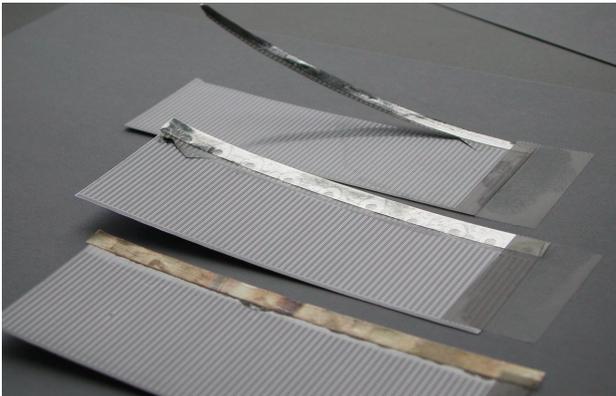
Stress on 80µm thin Ebara IBC cells interconnected to 70µm thick copper tabs. From back to front: soldering with iron, soldering with thermode, glued at 80°C.
